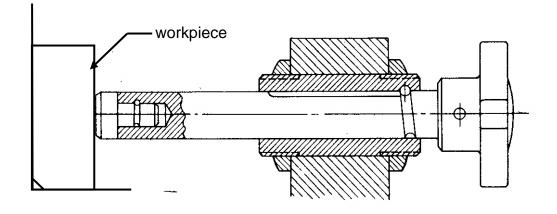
Quick acting screw (bayonet type) clamping.
